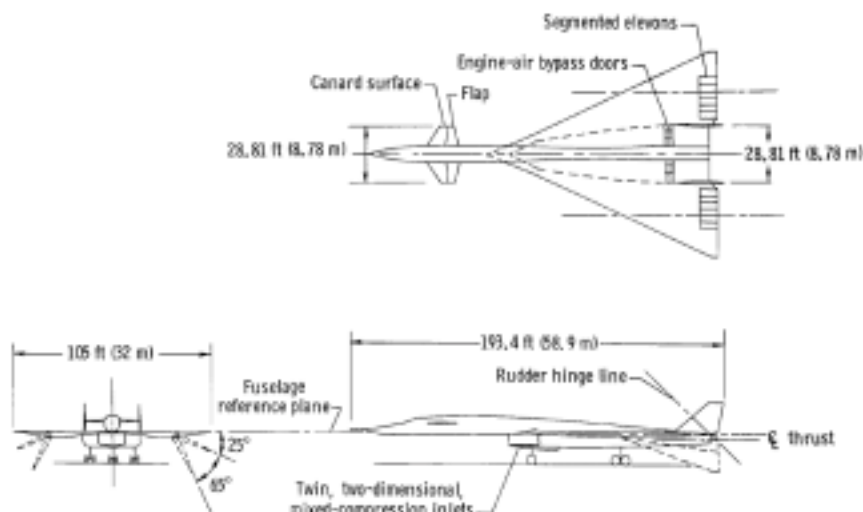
XB-70 GENERAL ASSEMBLY, DIMENSIONS, CONTROL SURFACE MOVEMENTS
